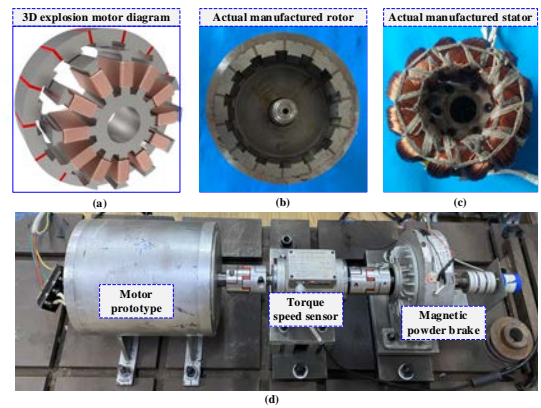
Prototype and experimental platform of the investigated FMPMH motor. (a) 3D explosion motor diagram. (b) Actual manufactured rotor. (c) Actual manufactured stator. (d) Test platform.
